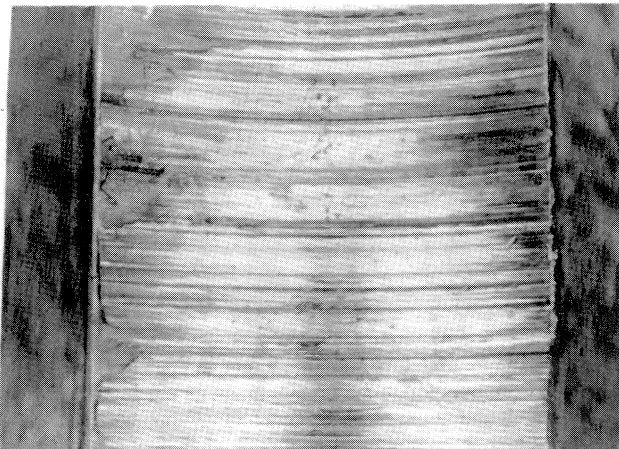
Abrasion of a 12 in (30 cm) Turbine Journal Bearing.
